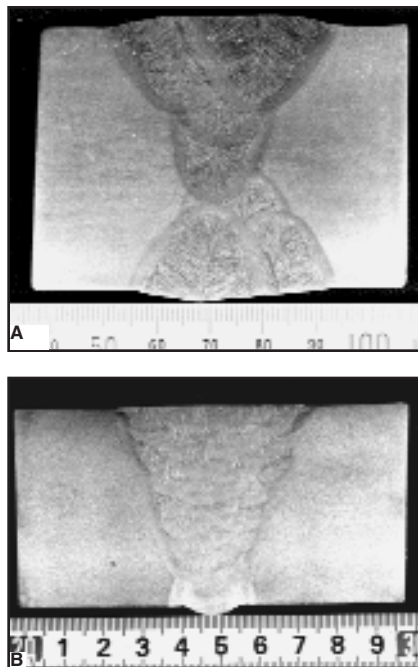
Macrostructure of weldments. A — SAW process; B — FCAW process.
